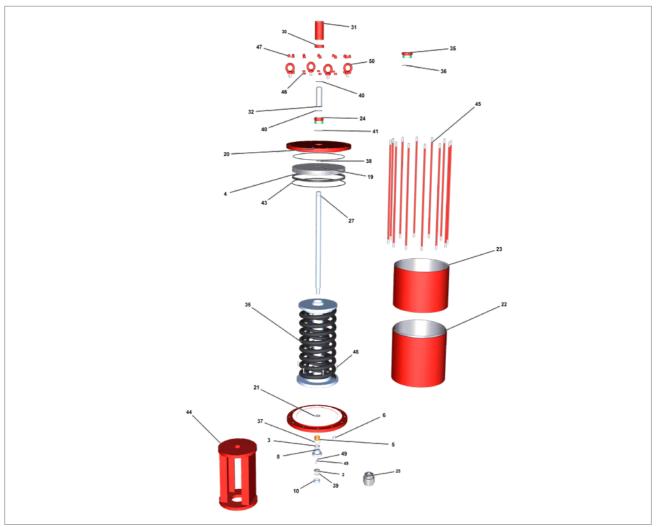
Linear pneumatic actuator type 1 / type 2 spring up
